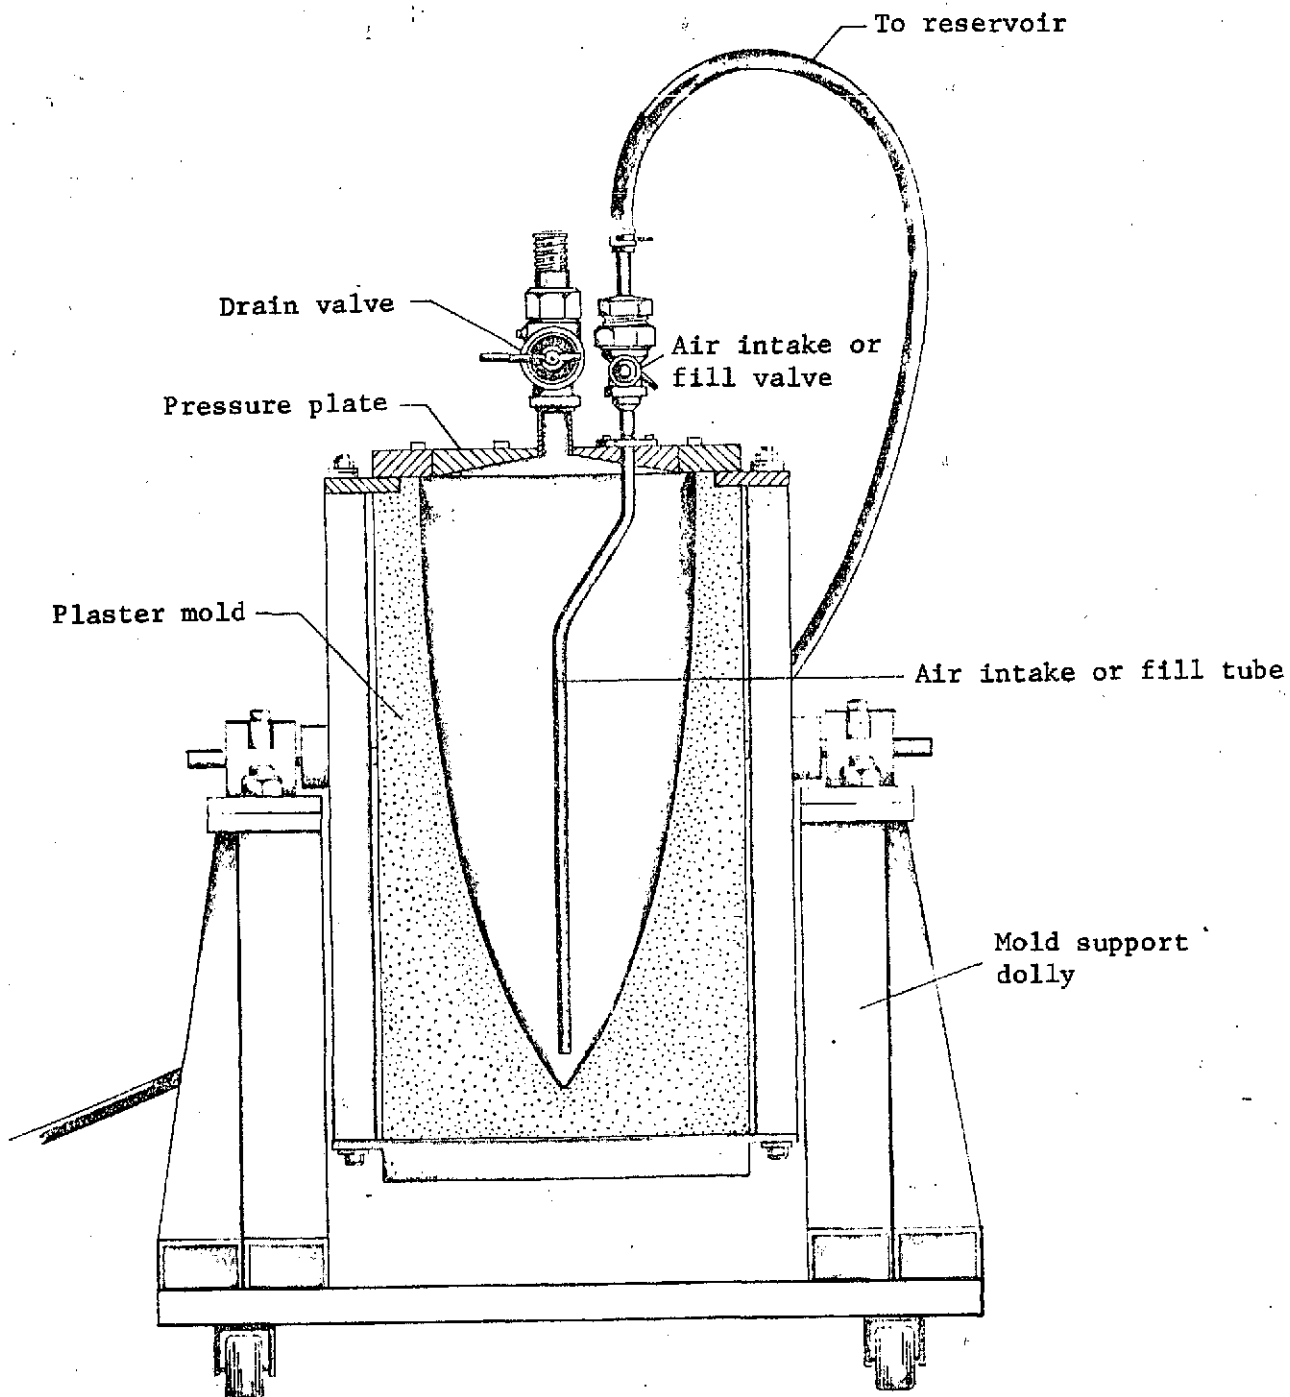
Pressure-casting setup for slip-casting the fused-silica radome
